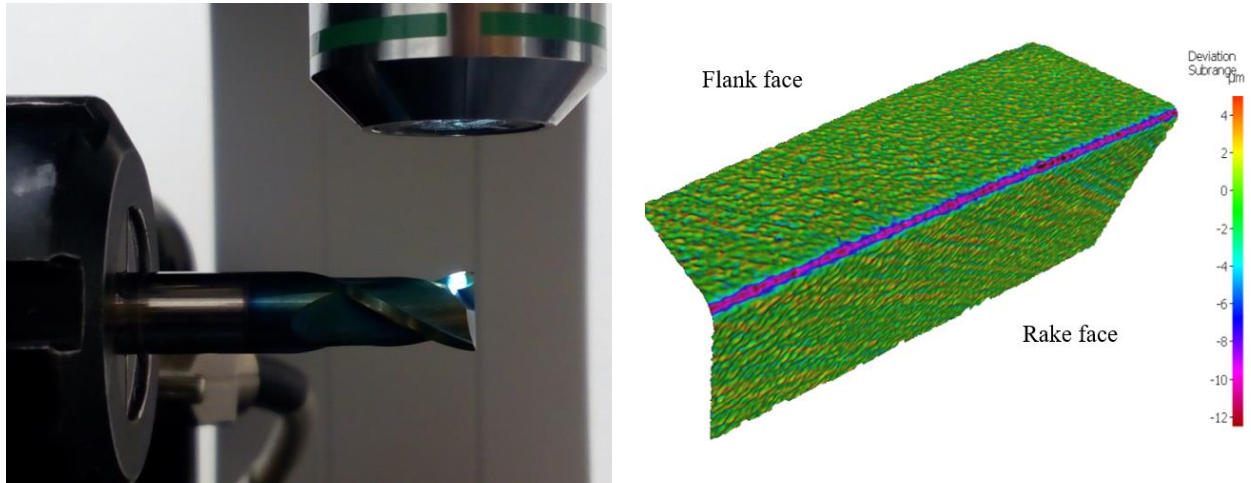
a) Cutting edge measurement by optical microscope IFM, b) Differential analysis of cutting edge after drag finishing
